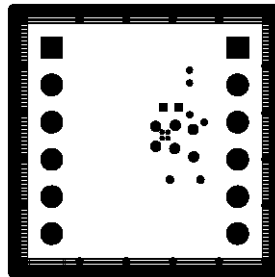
SMP-TPS7A1601-MVK Board Solder Mask – Bottom Side
